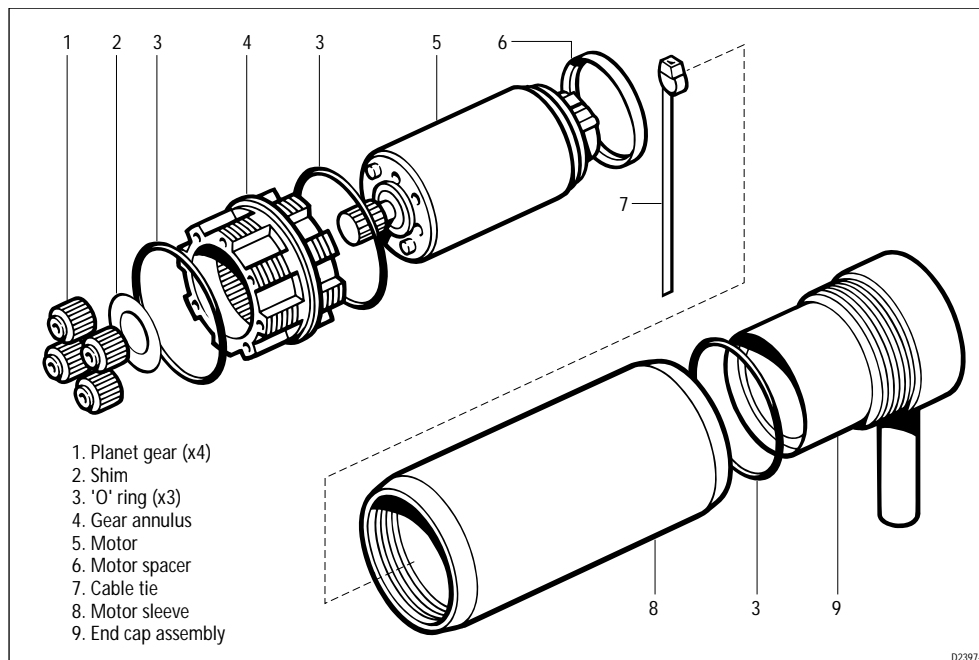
Tiller Drive Actuator GP conversion kit (W003)
